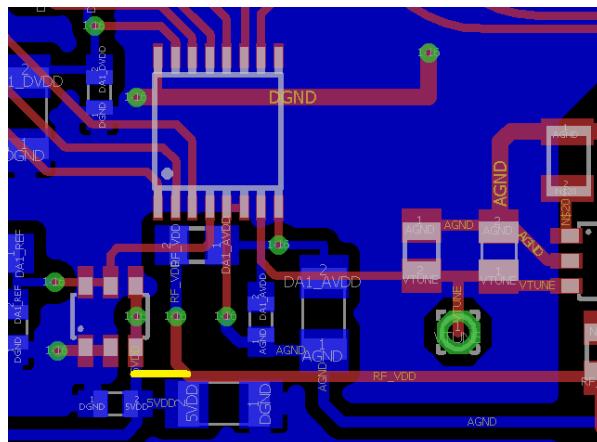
Merged 5VDD and RF\_VDD PCB layout
